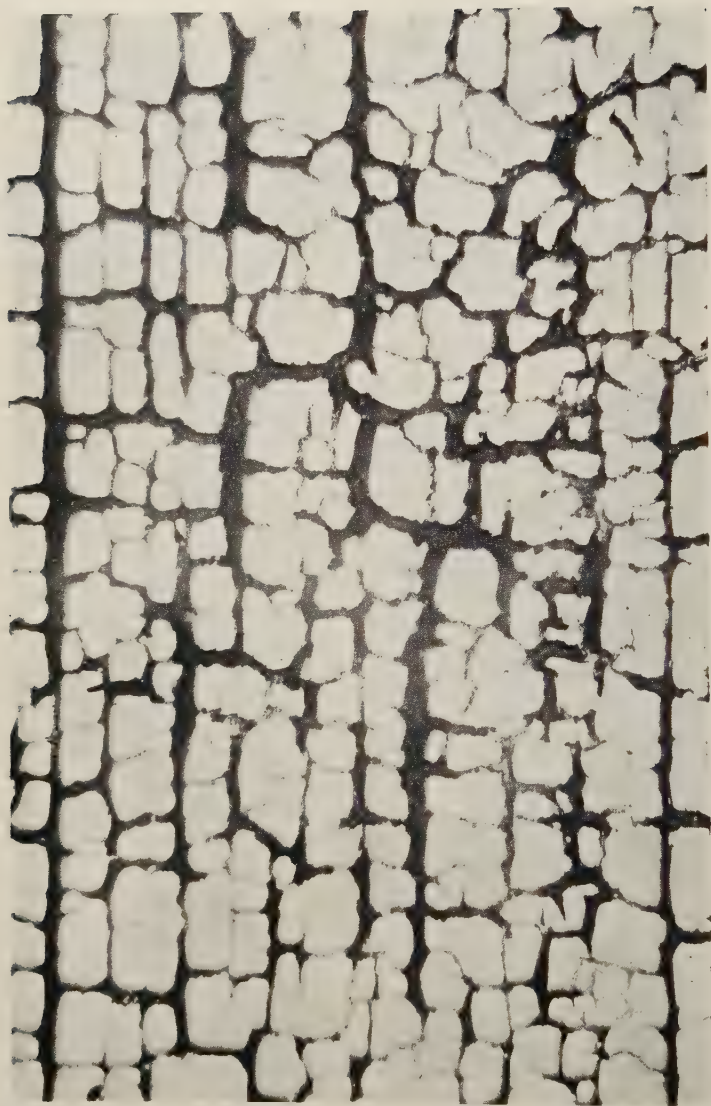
Surface cracking in the groove of a 16-in. gun at 27 ft. forward of the commencement of rifling. $\times 50$.
